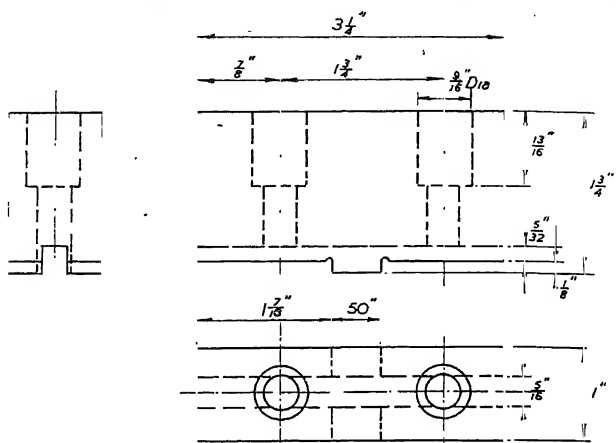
Soft jaw blanks for Union 3-jaw chuck (with replaceable jaws). 8 in.
